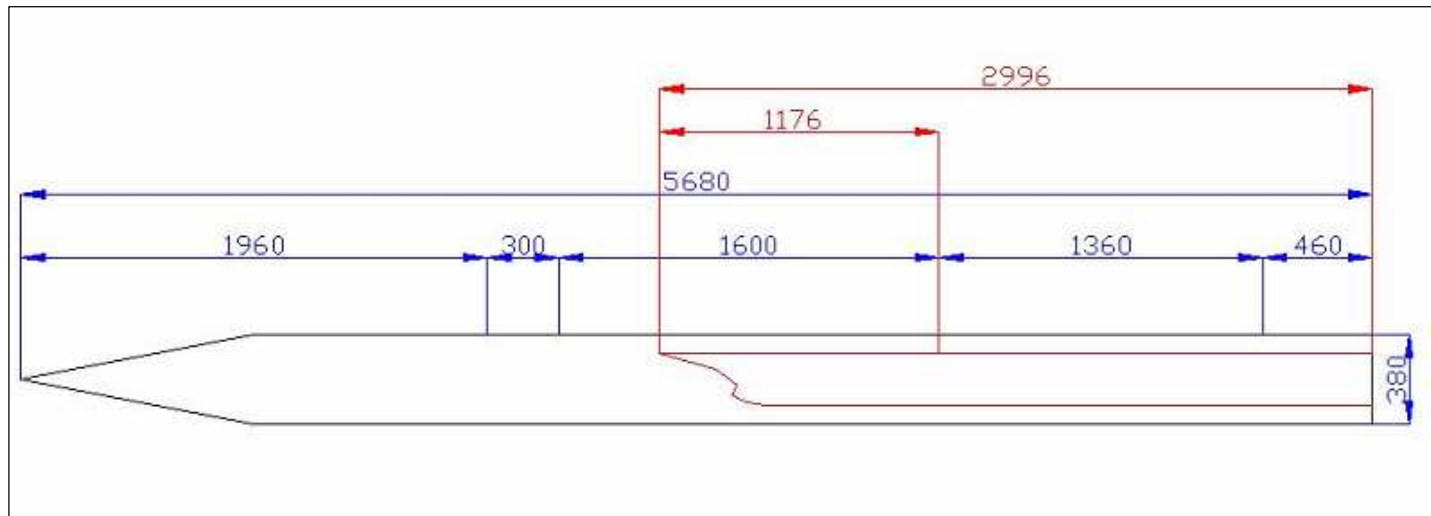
Side view drawing of the inlet installed on the missile body (dimensions in mm)
